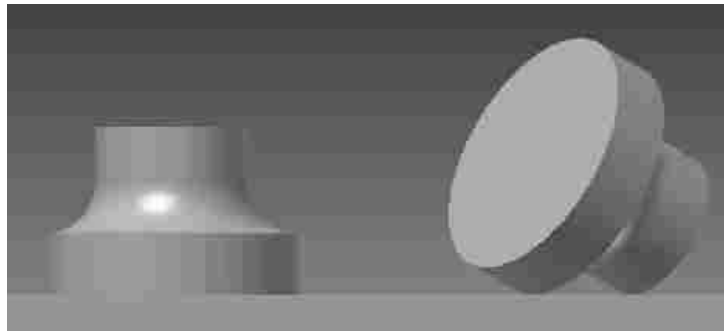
A Bit "Blank" Prior to Machining Interface Geometry
